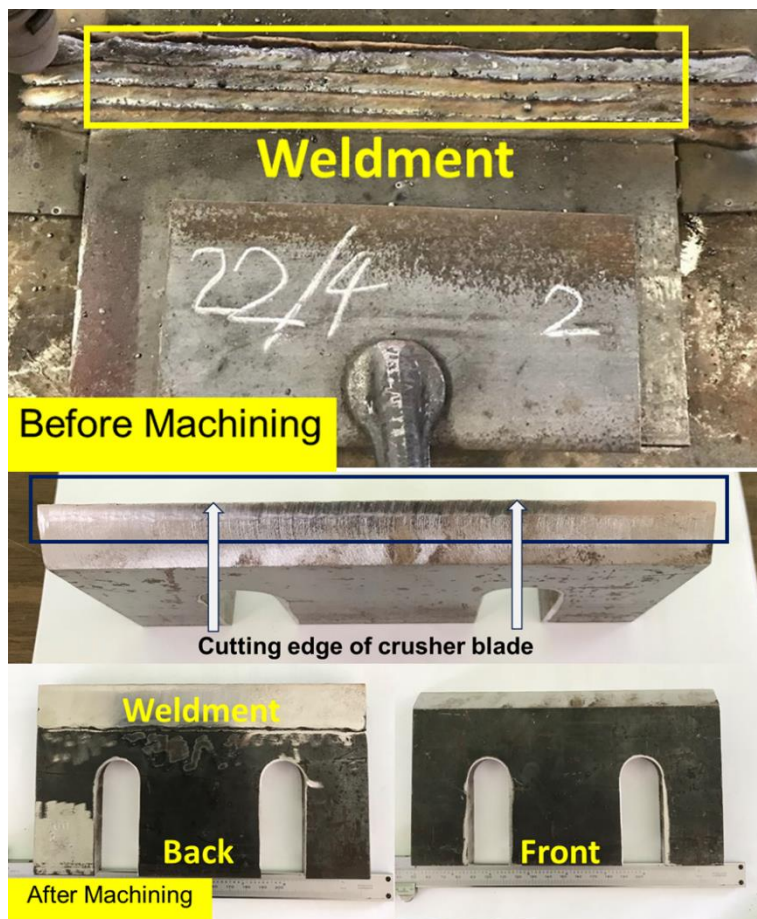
Visual testing of the welded specimen before and after machining of the excess weld.
